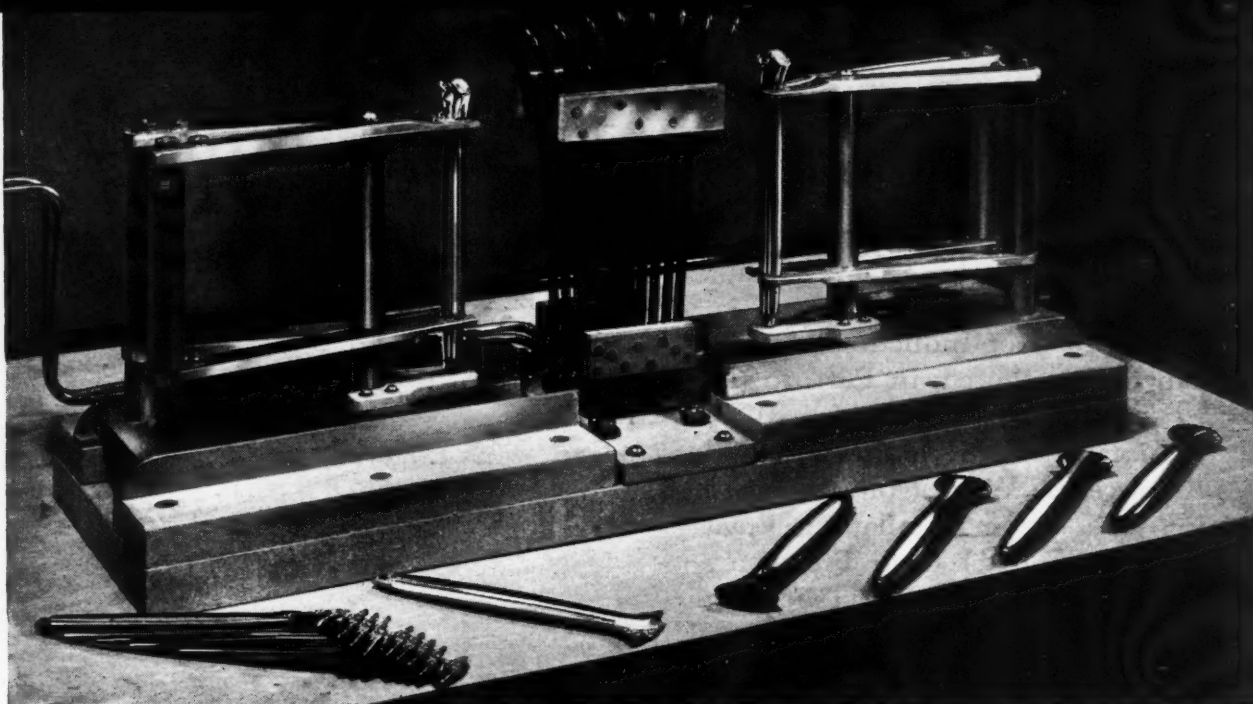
Formed Strips of Brass, Mounted in a Fixture that Slides in a Groove, are Brazed Two at a Time in a Special Contour-following Coil
